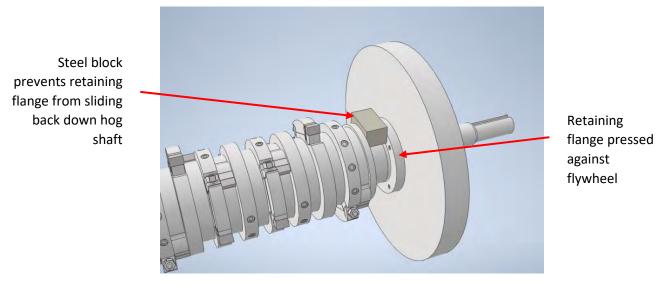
Flywheel Retaining Flange Pressed Against Flywheel (ER)
